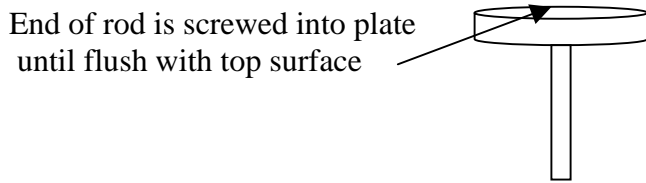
An aluminum rod is threaded to fit into a 1-14 thread tapped into aluminum plate.
